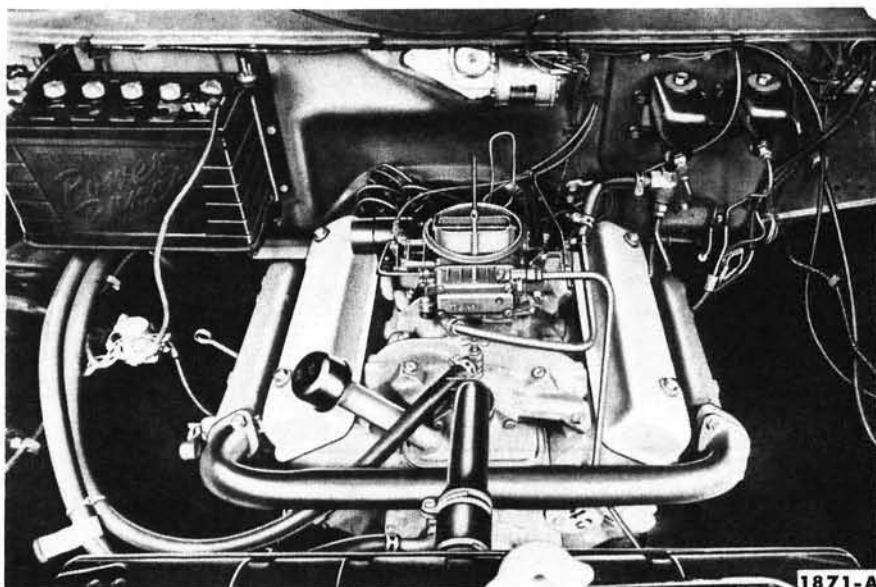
MD V-8 Engine Installation—F-Series Truck
